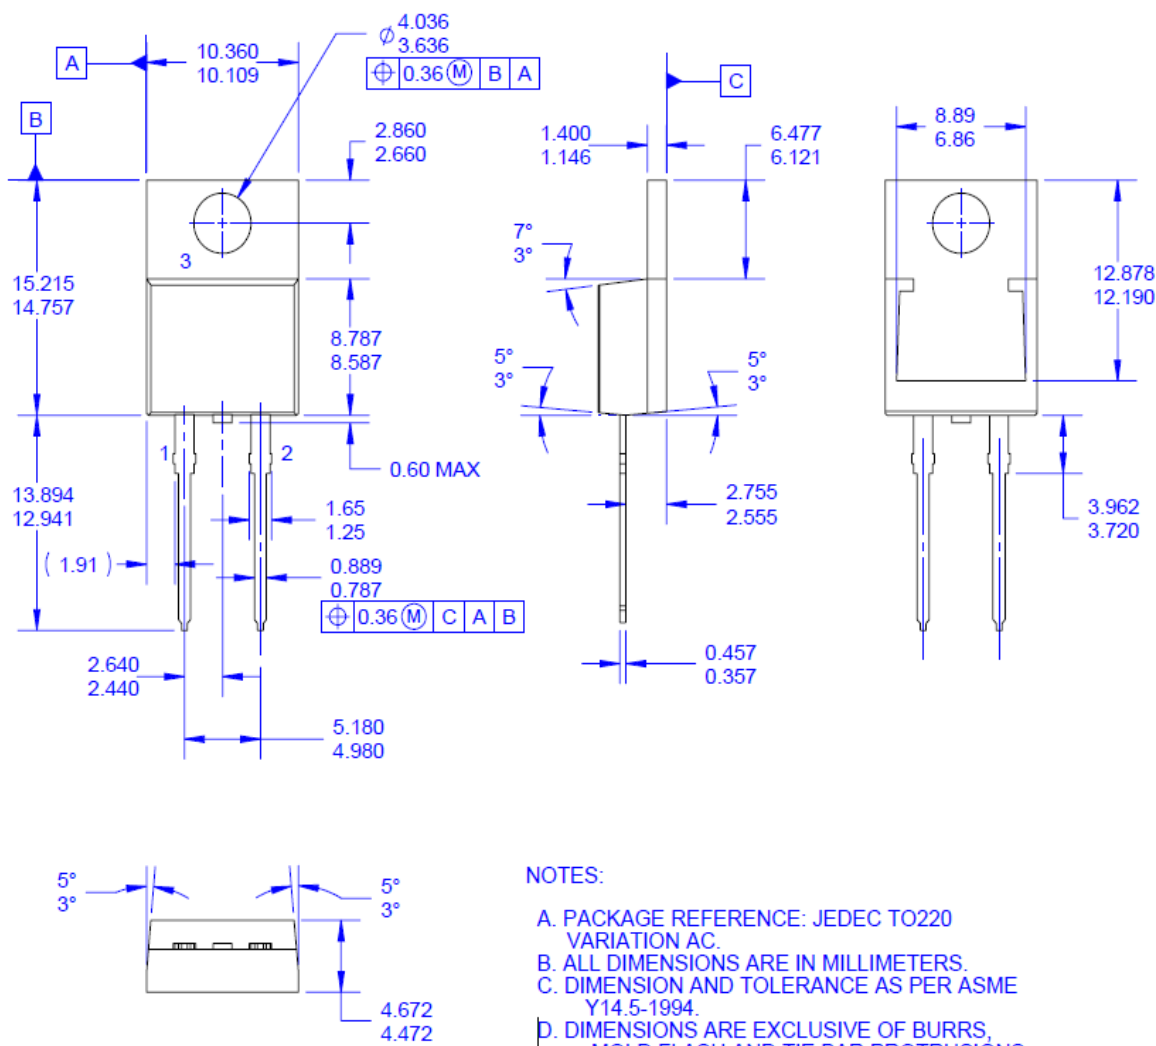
TO-220 2L - TO-220, MOLDED, 2LD
